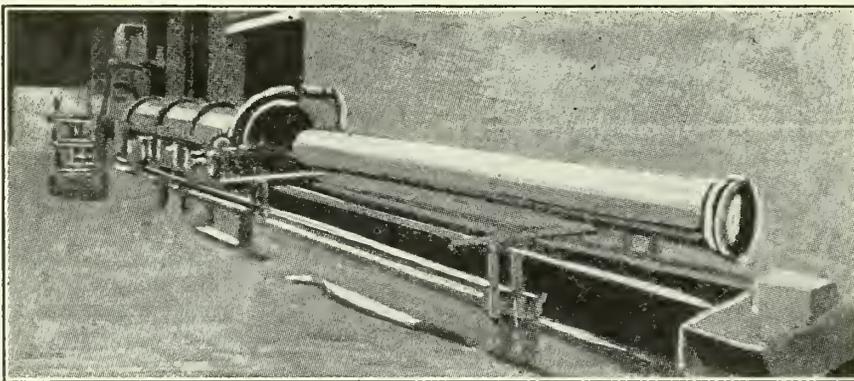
14 inch De Lavaud Pipe immediately after leaving machine.
